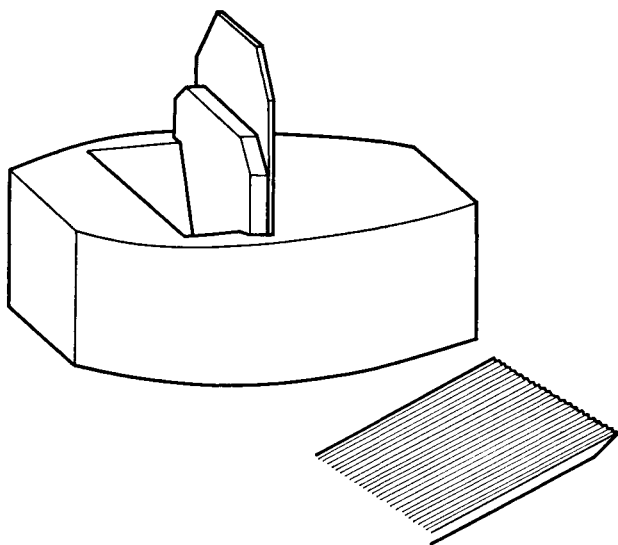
The tothing plane with a serrated edged blade is used for roughing surfaces prior to veneering.
